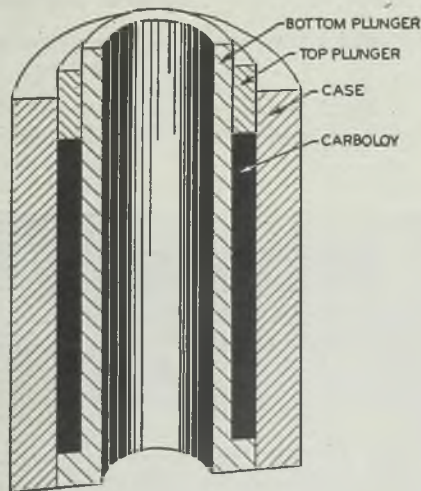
Molds for cemented carbide parts comprise an outer case, an inner core and a ring or plunger to squeeze down the carbide powder into dense mass
